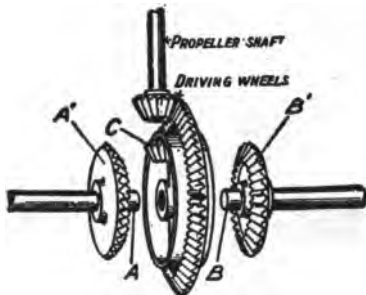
Fig. VII.—Complete Differential showing bevel, drive and pulley.
